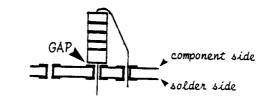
INSTALLING A RESISTOR ON ITS END.
